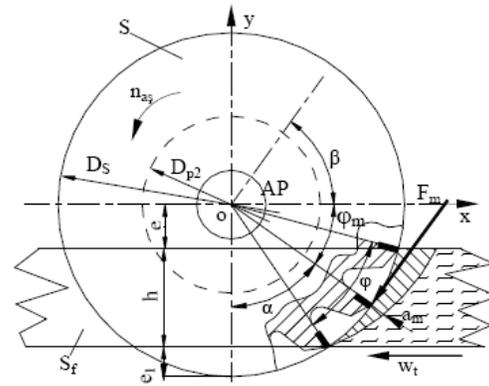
Geometrical and technological parameters of the disk miller cutting
